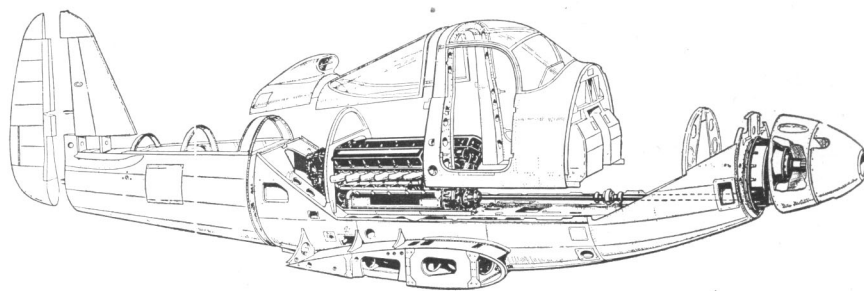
Cutaway drawing showing structural details of the Bell P-39 Airacobra.
